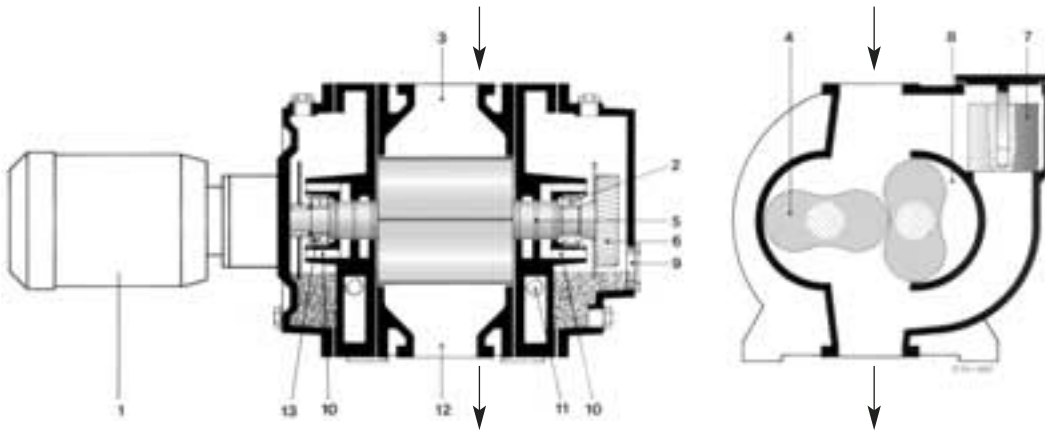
Sectional representation of a Roots vacuum pump (WKP 500 A, Pfeiffer Vacuum GmbH).
